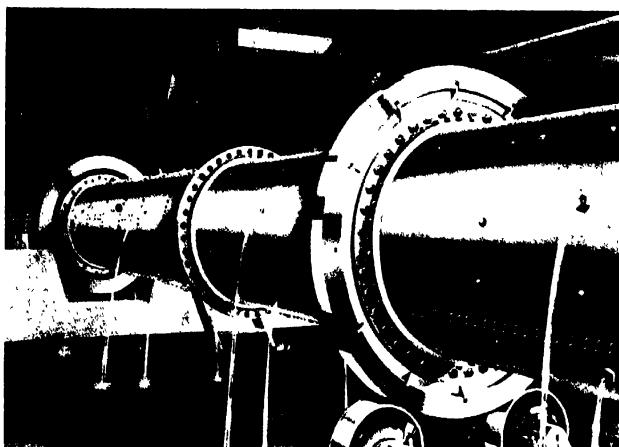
Burt Revolving Filter—Locking Mechanism.
